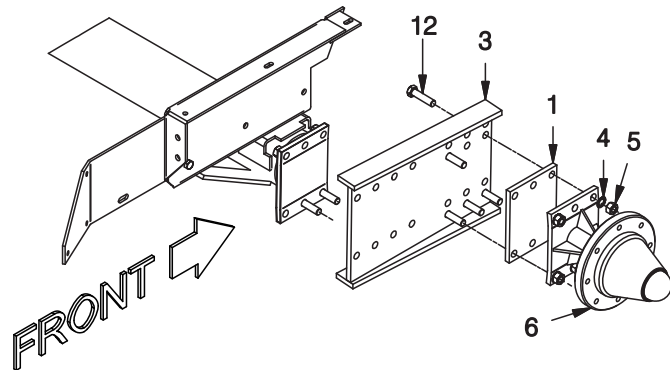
Mounting Wheel Extension, Spacer and Hub
